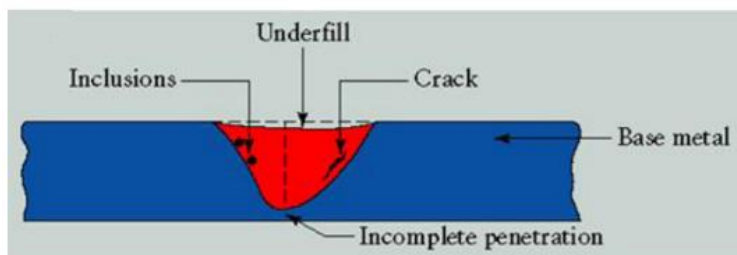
Types of weld defects (Ikpe et al., 2023)
